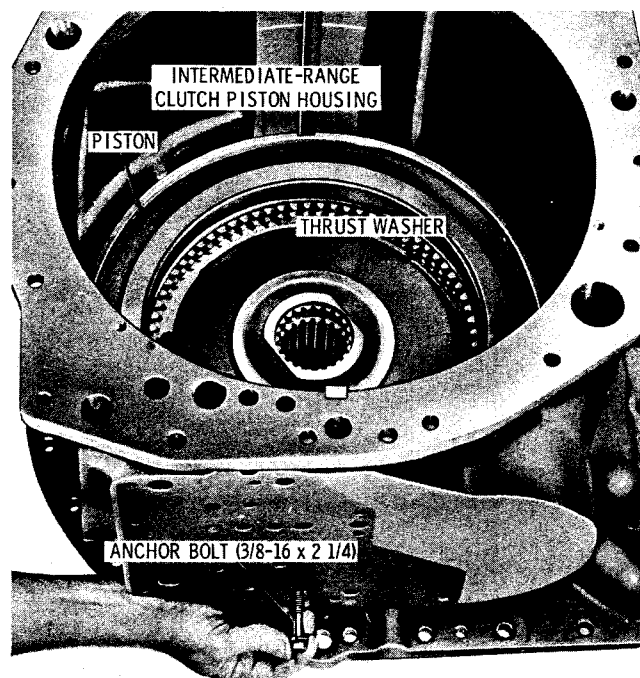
Removing intermediate-range clutch piston housing anchor bolt
